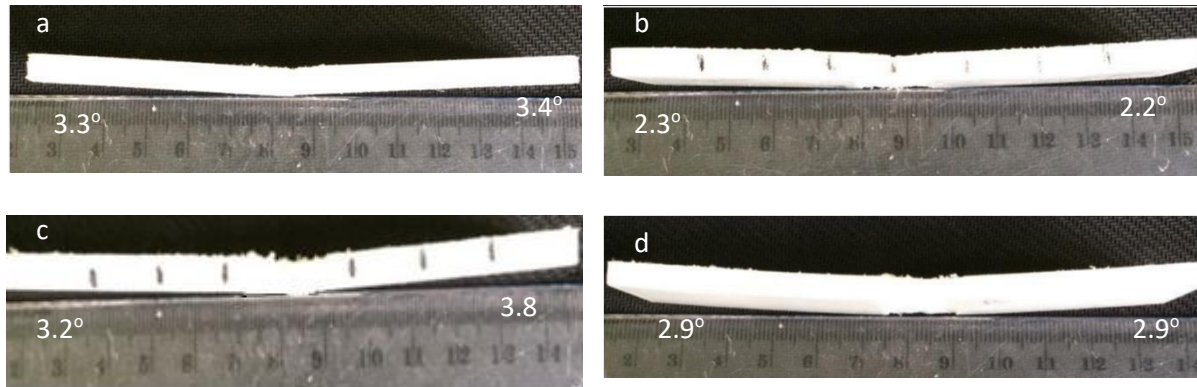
Angular distortion of FSW joint with single side welding at (a) 900rpm, (c) 2000 rpm, double side welding at (b) 900 rpm, (d) 2000 rpm
